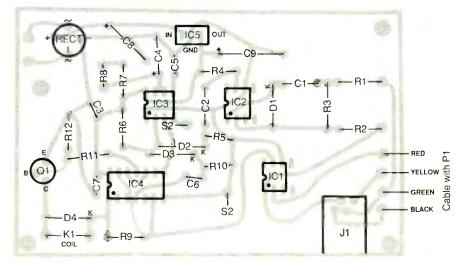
Wiring guide for pc board. Use this layout if you wire the project on perforated board.
